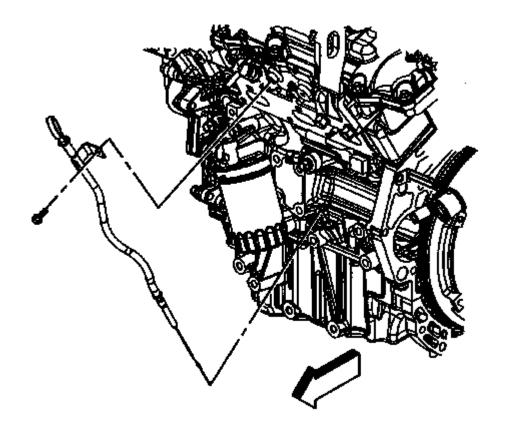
Identifying Oil Level Indicator Tube & Bolt Courtesy of GENERAL MOTORS COMPANY
